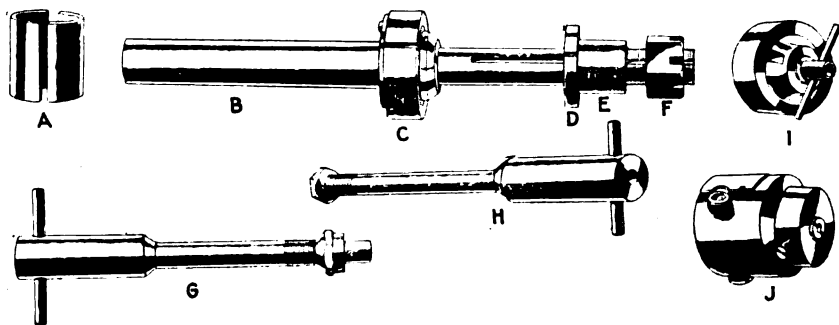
HOLDING FIXTURE FOR SLITTING BUSHINGS
